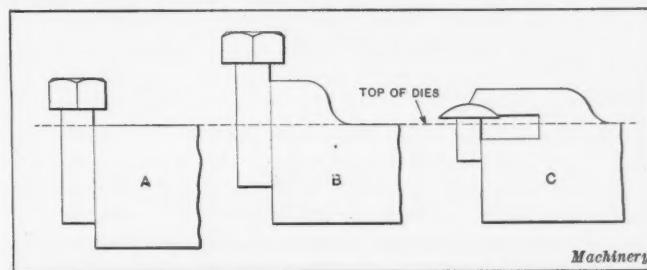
Push-fingers or Starters for Thread-rolling Machines
